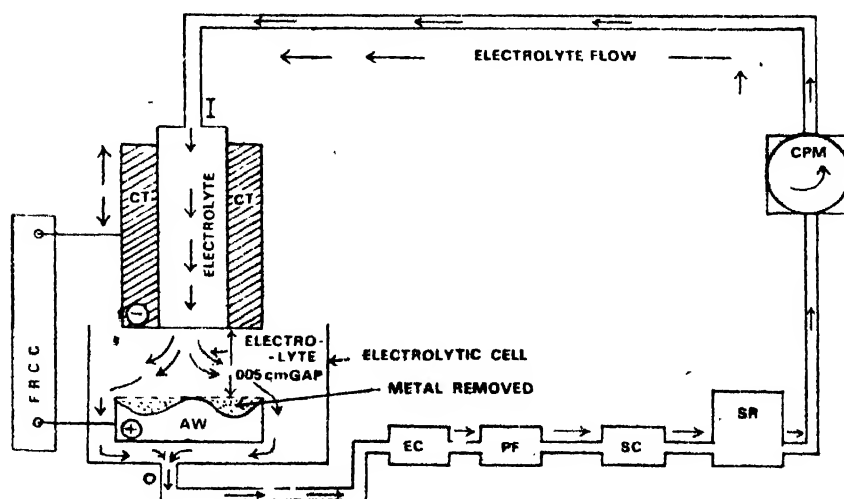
Schematic illustration of ECM assembly; I. Inlet; O. outlet; CT Cathodic toolpiece (hollow tube); AW-Anodic workpiece; FRCC-Feed rate control circuit; CPM-centrifugal pump and motor; SR-Solution reservoir; SC-Solution concentrator; PF-Purifier (filter); EC-Electrolyte collector
